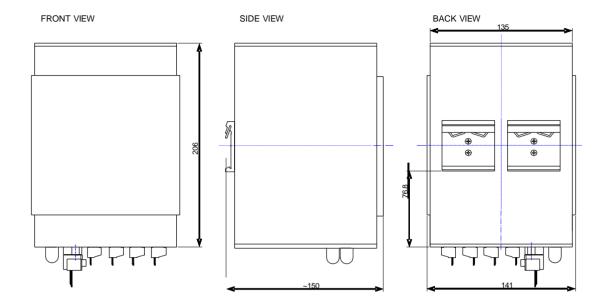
Dimensions for din rail mounting of 24 HP panel instrument case
